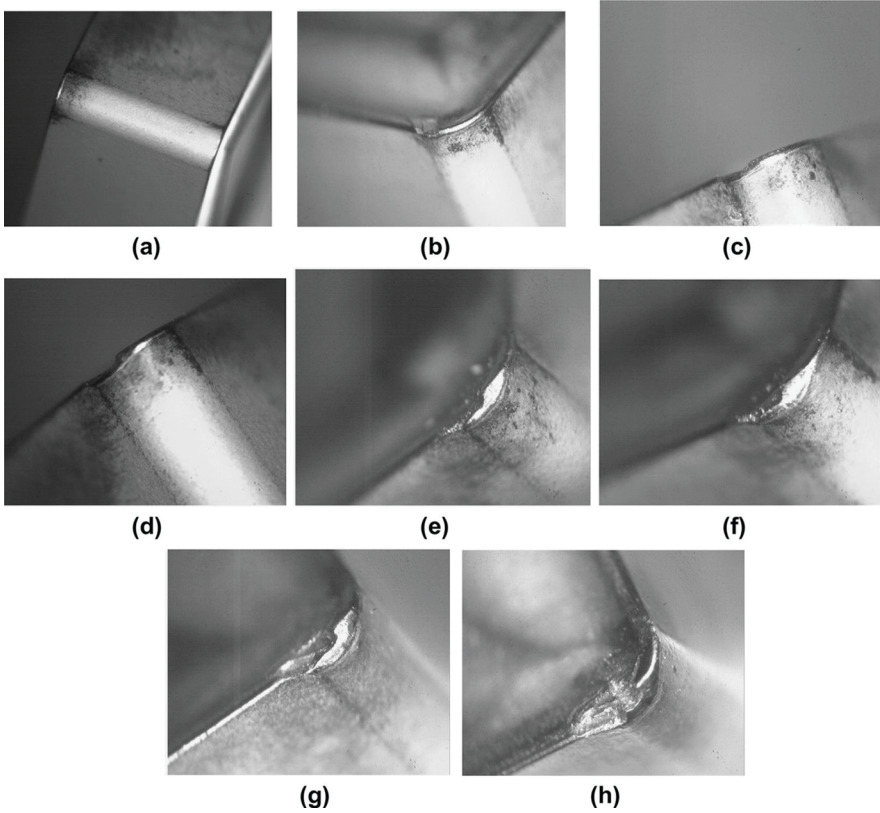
Tool tips of TiN coated carbide insert after machining times (a) 0.9 min, (b) 1.77 min, (c) 3.44 min, (d) 5.65 min, (e) 8 min, (f) 10.1 min, (g) 15.63 min and (h) 19.48 min. (From Ref. [14].)
